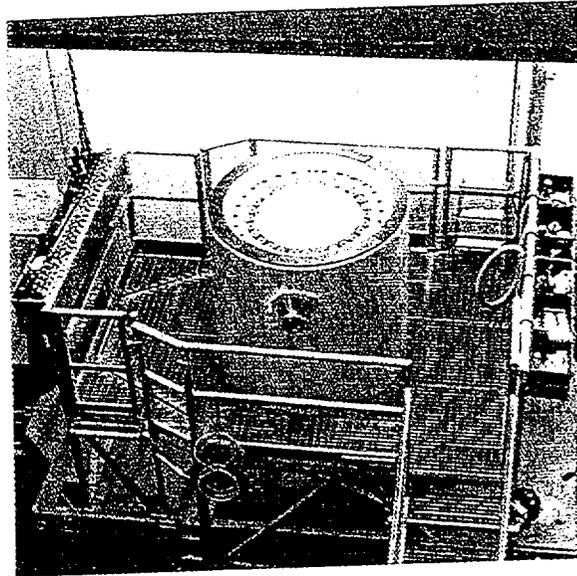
View onto the assembly station with a CASTOR cask positioned on the flat-bed cargo trailer
